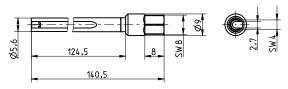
Mounting wrench ø5,6 mm, slotted, Type 1300B14
